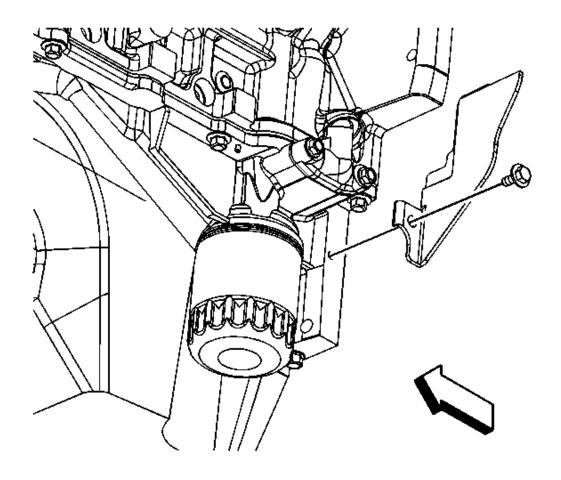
View Of Left Side Transmission Cover Bolt Courtesy of GENERAL MOTORS CORP.
